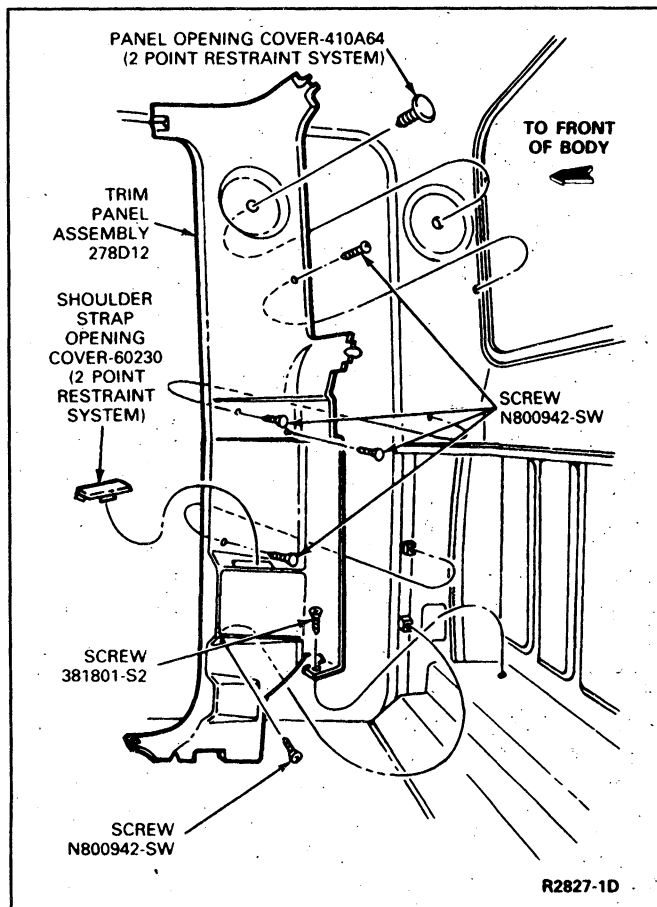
F-250—F-350 Over 8500 G.V.W. Rear Corner Trim Panels—Regular Cab Shown, Crew Cab Typical
